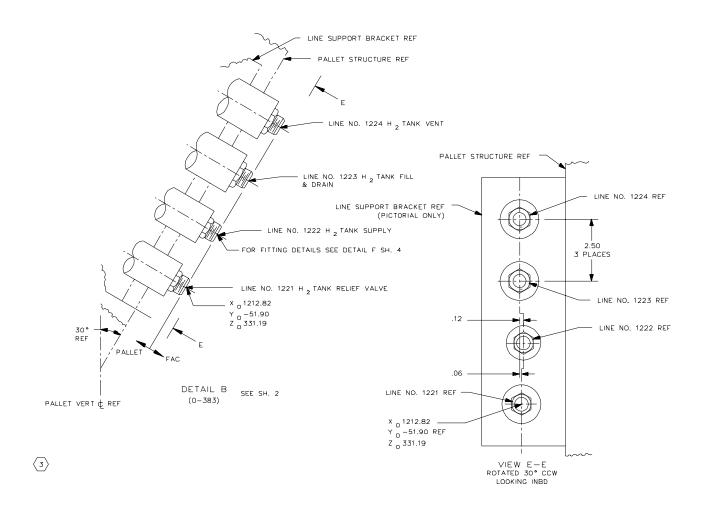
EDO CRYO PALLET H2 DETAILS
